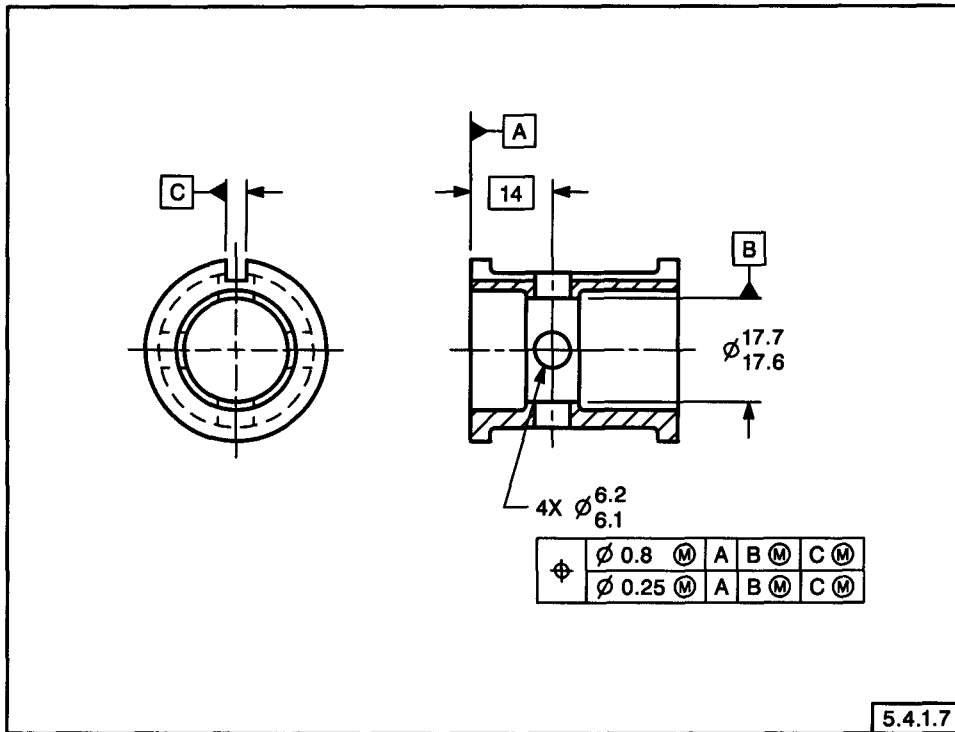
RADIAL HOLE PATTERN LOCATED BY COMPOSITE POSITIONAL TOLERANCING
